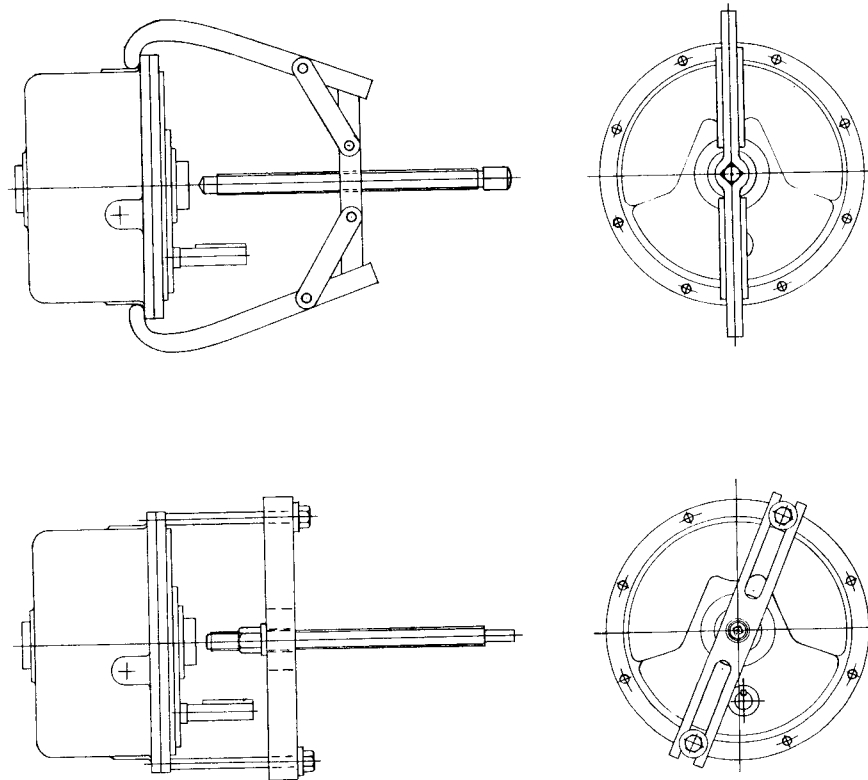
Shaft Mounted Unit - Standard Pullers
